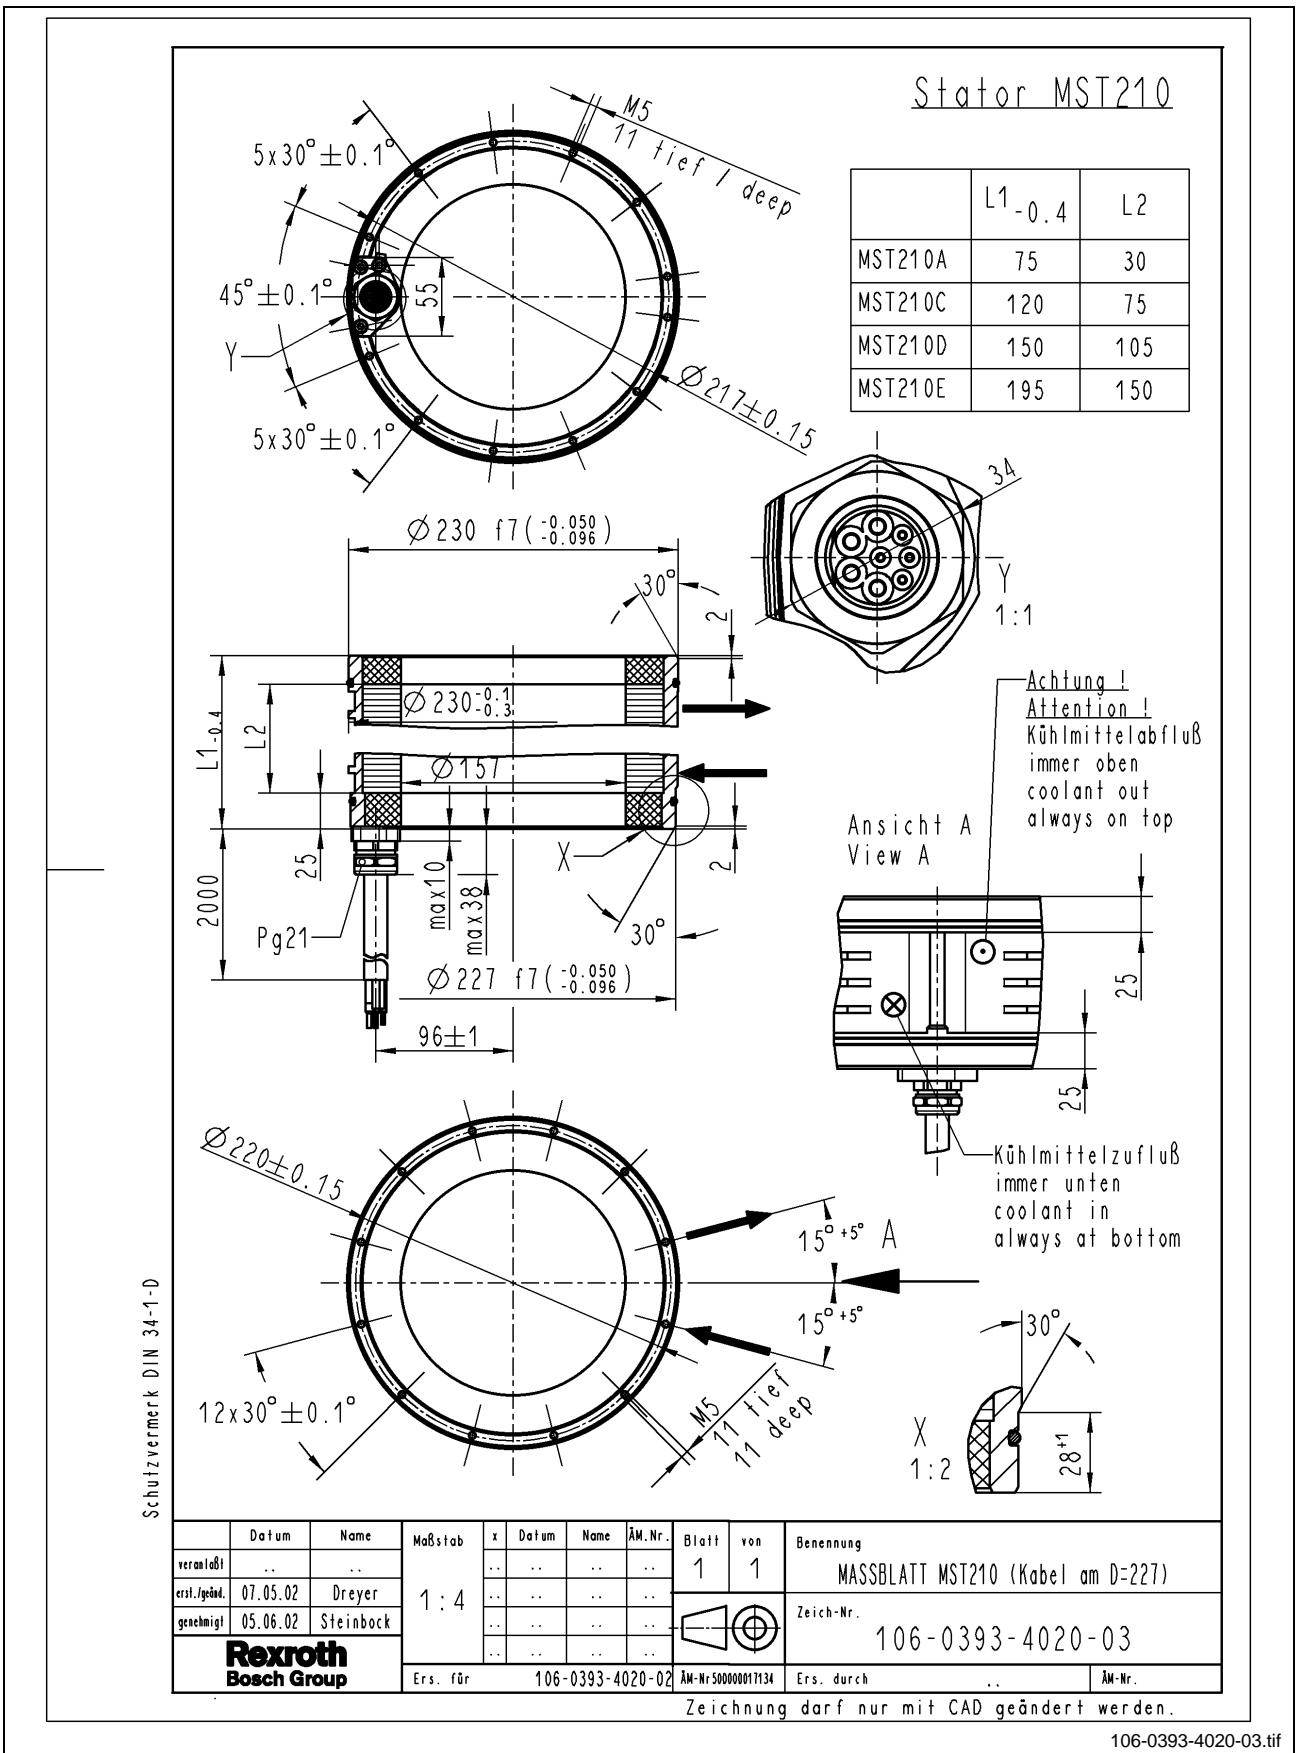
Dimension sheet MST210, electrical connection "SN"
